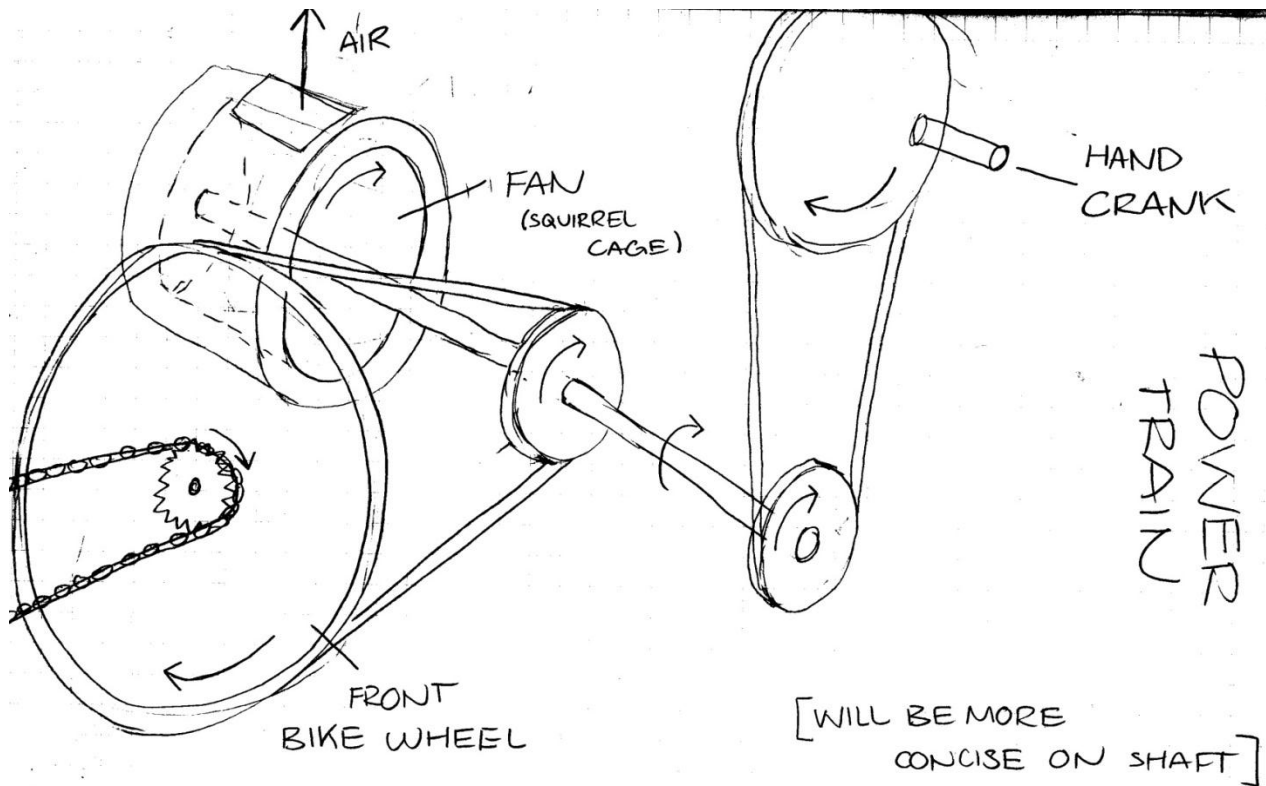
Bike-Blower Front Wheel Drive Configuration. While the Blower Bike idea was dropped along the way to the final Gear It Up design, the hand crank connection seen here is essentially what is being used in Gear It Up, except with a chain and gears instead
